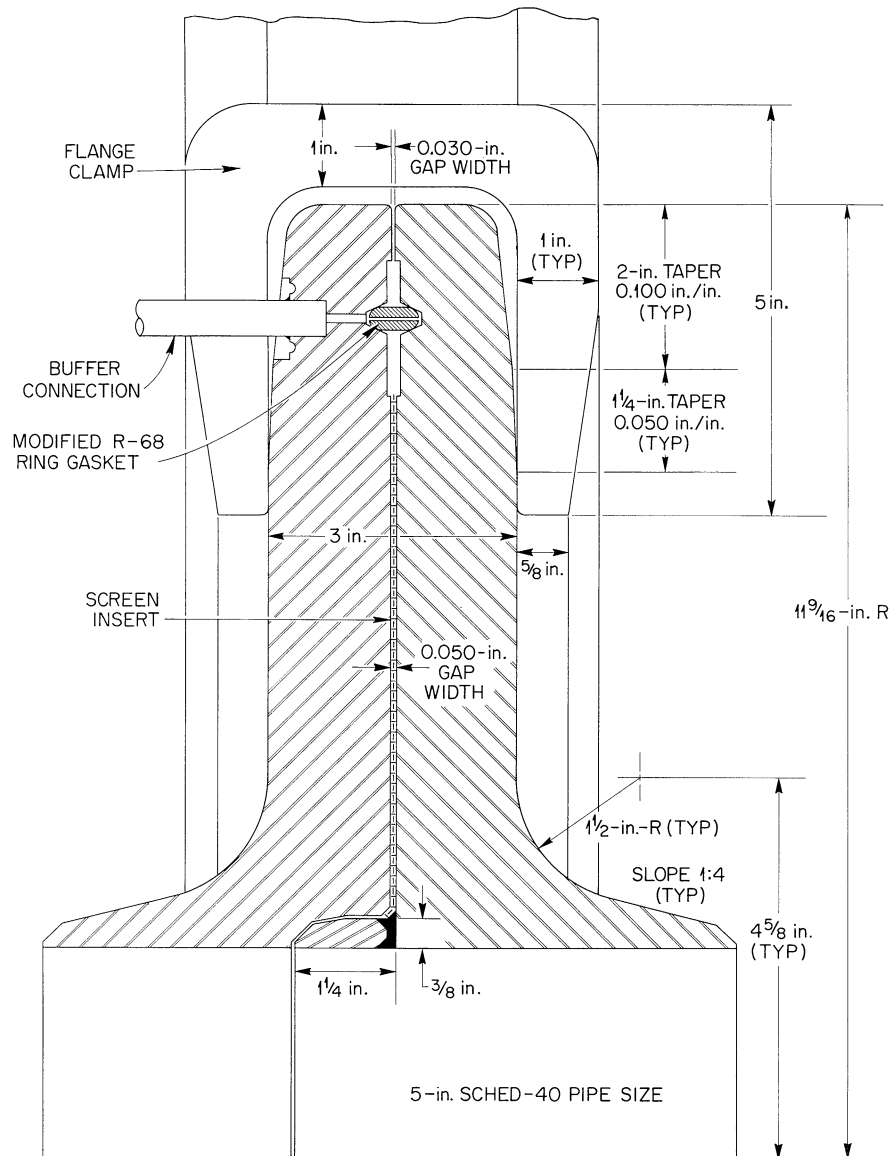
Five-inch Molten-Salt Freeze Flange.
